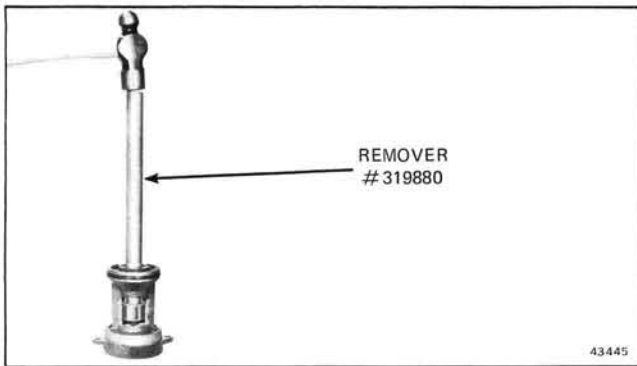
Removing Gearcase Bearing Housing Aft Bearing
